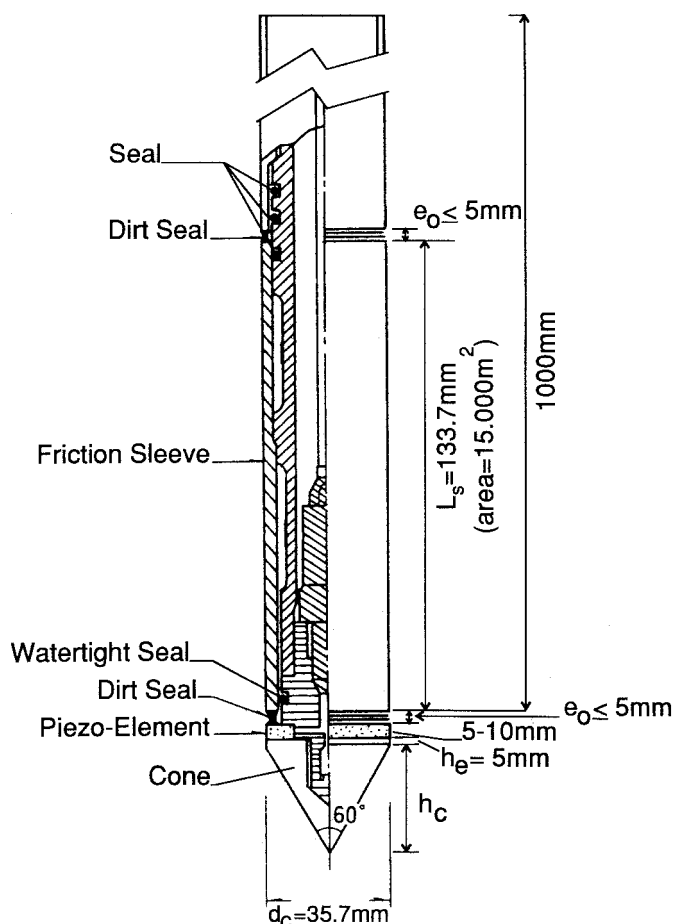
Example of a Reference Penetrometer With a Fixed Cone and With Friction Sleeve
